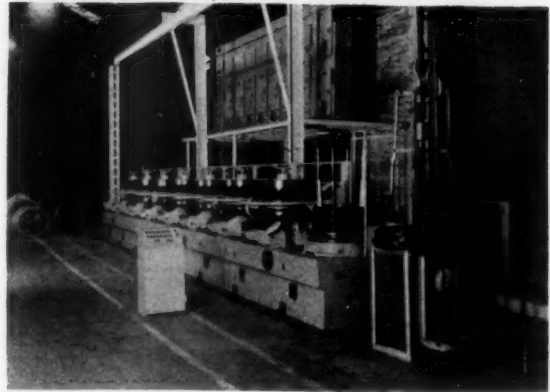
A Barron & Crowther non-stop 7-die machine with air- and water-cooled double blocks, handling rod of 232 mils and reducing to 80 mils at 75 tons per sq in. at 1129 fpm
